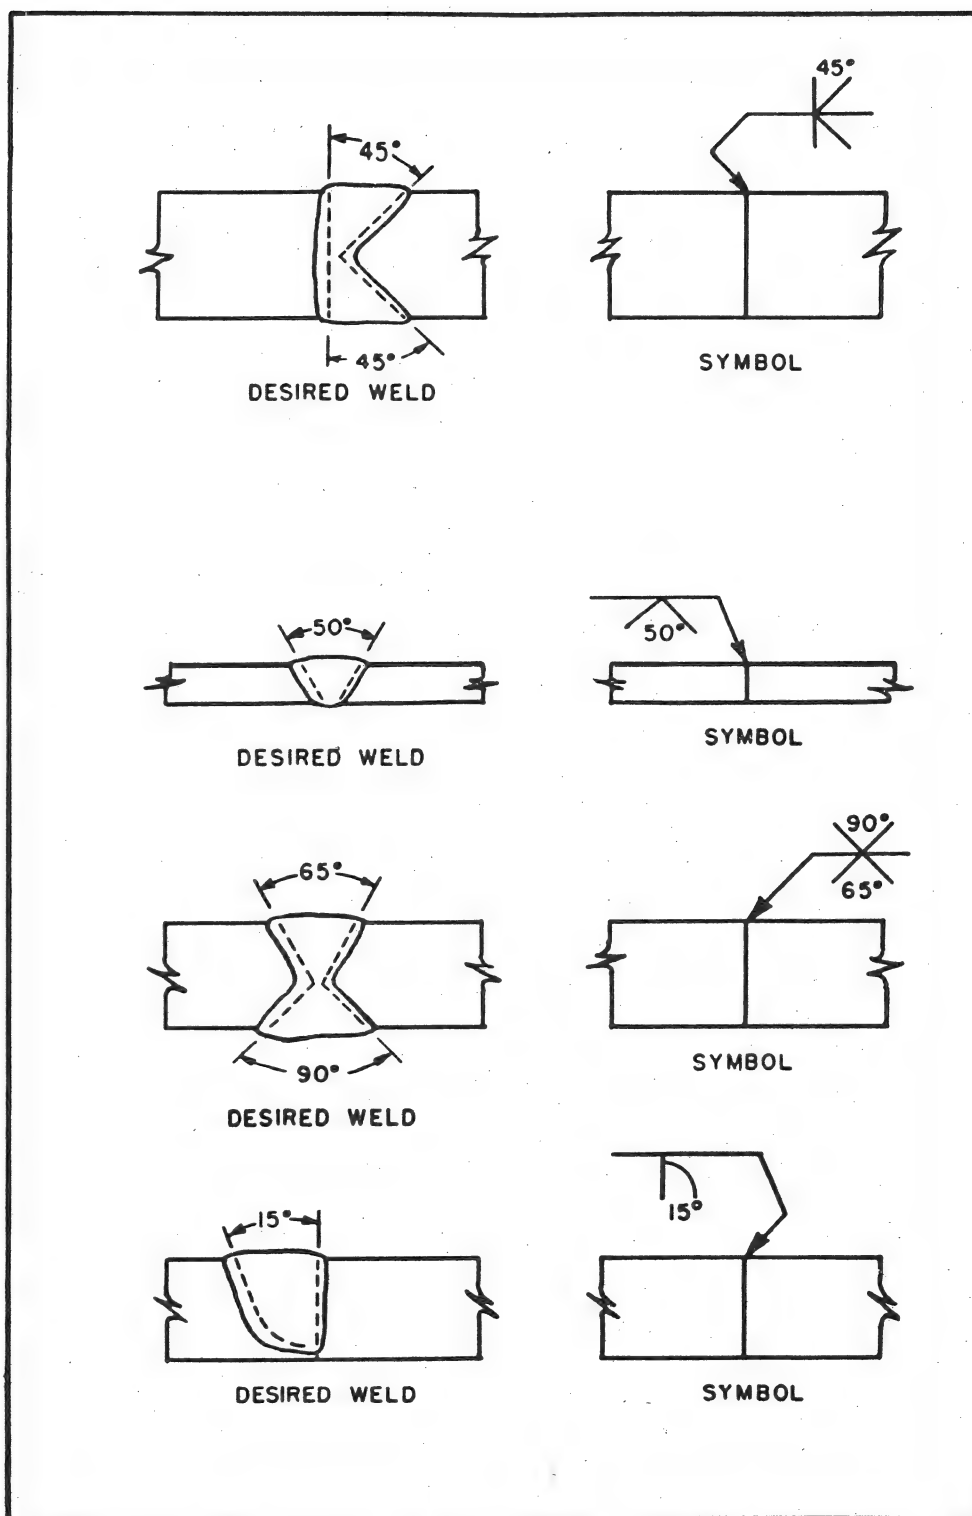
Designation of Groove Angle of Groove Welds
